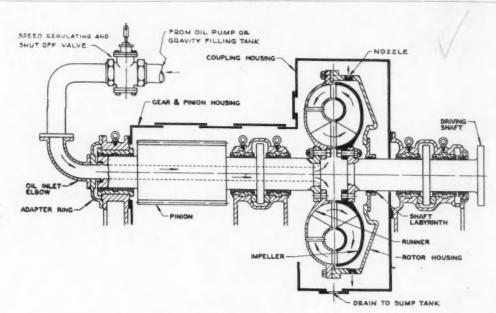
Hydraulic coupling and pinion gear of a typical marine installation
